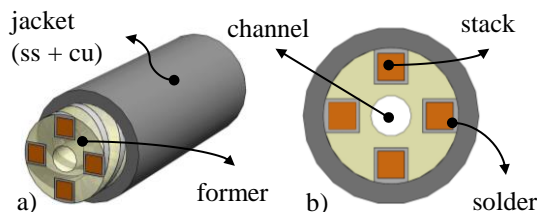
a) 3D CAD drawing of the VIPER cable; b) 2D CAD cross-section of the VIPER cable. The main components labels are also displayed.
